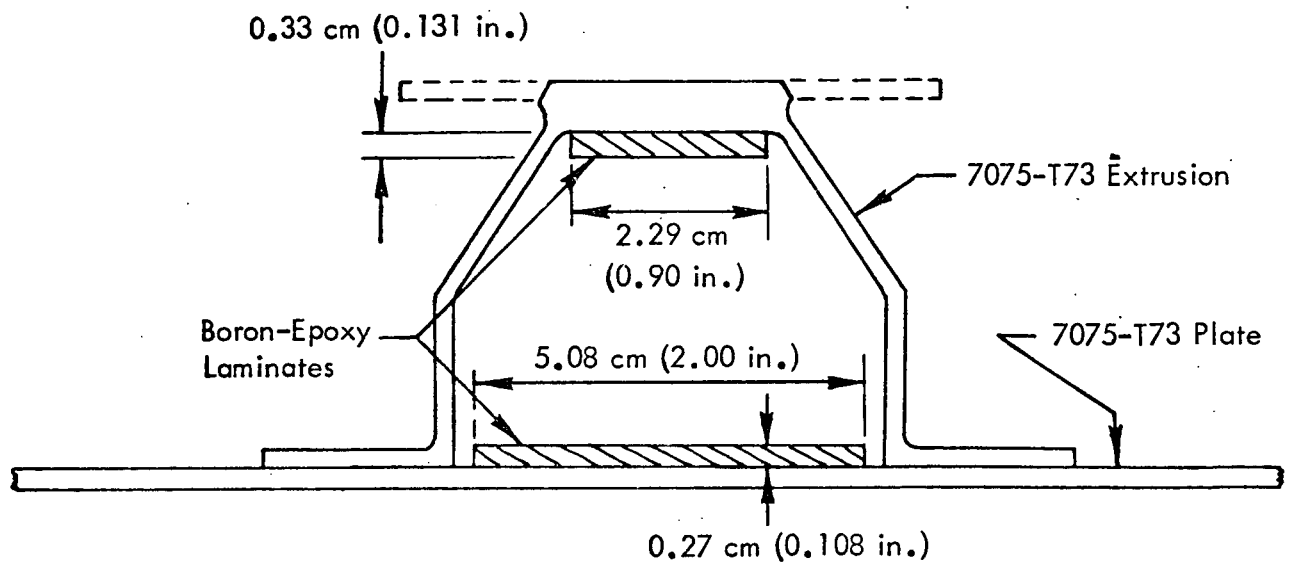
TYPICAL LOWER SURFACE STRINGER ELEMENT
